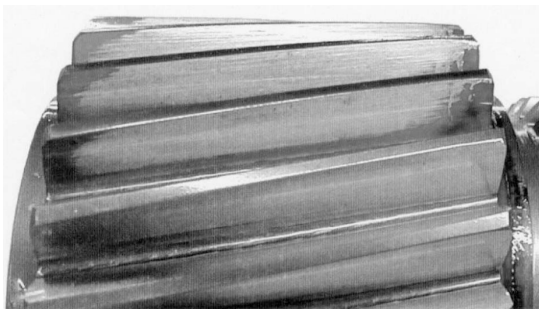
Tooth bearing of Concave conical gear used in practical marine transmission
